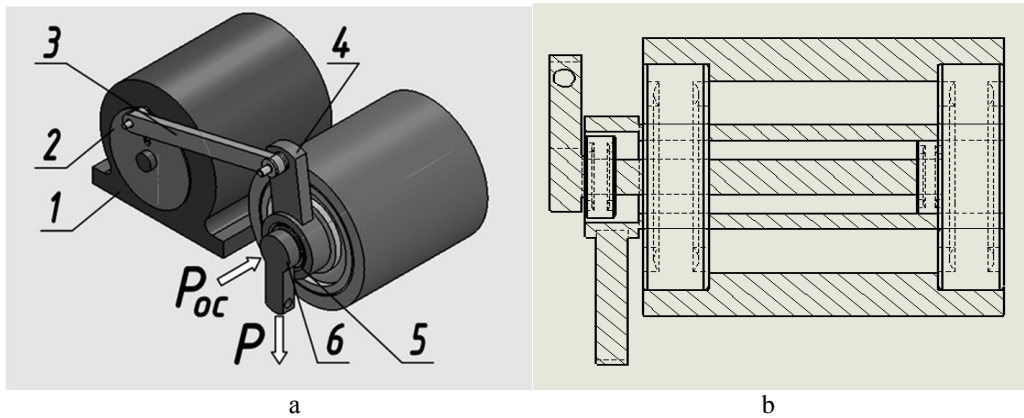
Scheme of the developed installation (a) for resource tests of spherical bearings with a load of up to 200 kN and the design of the housing that allows holding and loading the bearing (b): 1 – electric motor-gearbox, 2 – disk for changing the angle and oscillations, 3 – force transmission lever, 4 – retainer of the outer bracket of the bearing, 5 – housing (main unit) where the hinged bearing is located, 6 – lever of the inner bracket of the hinged bearing.
